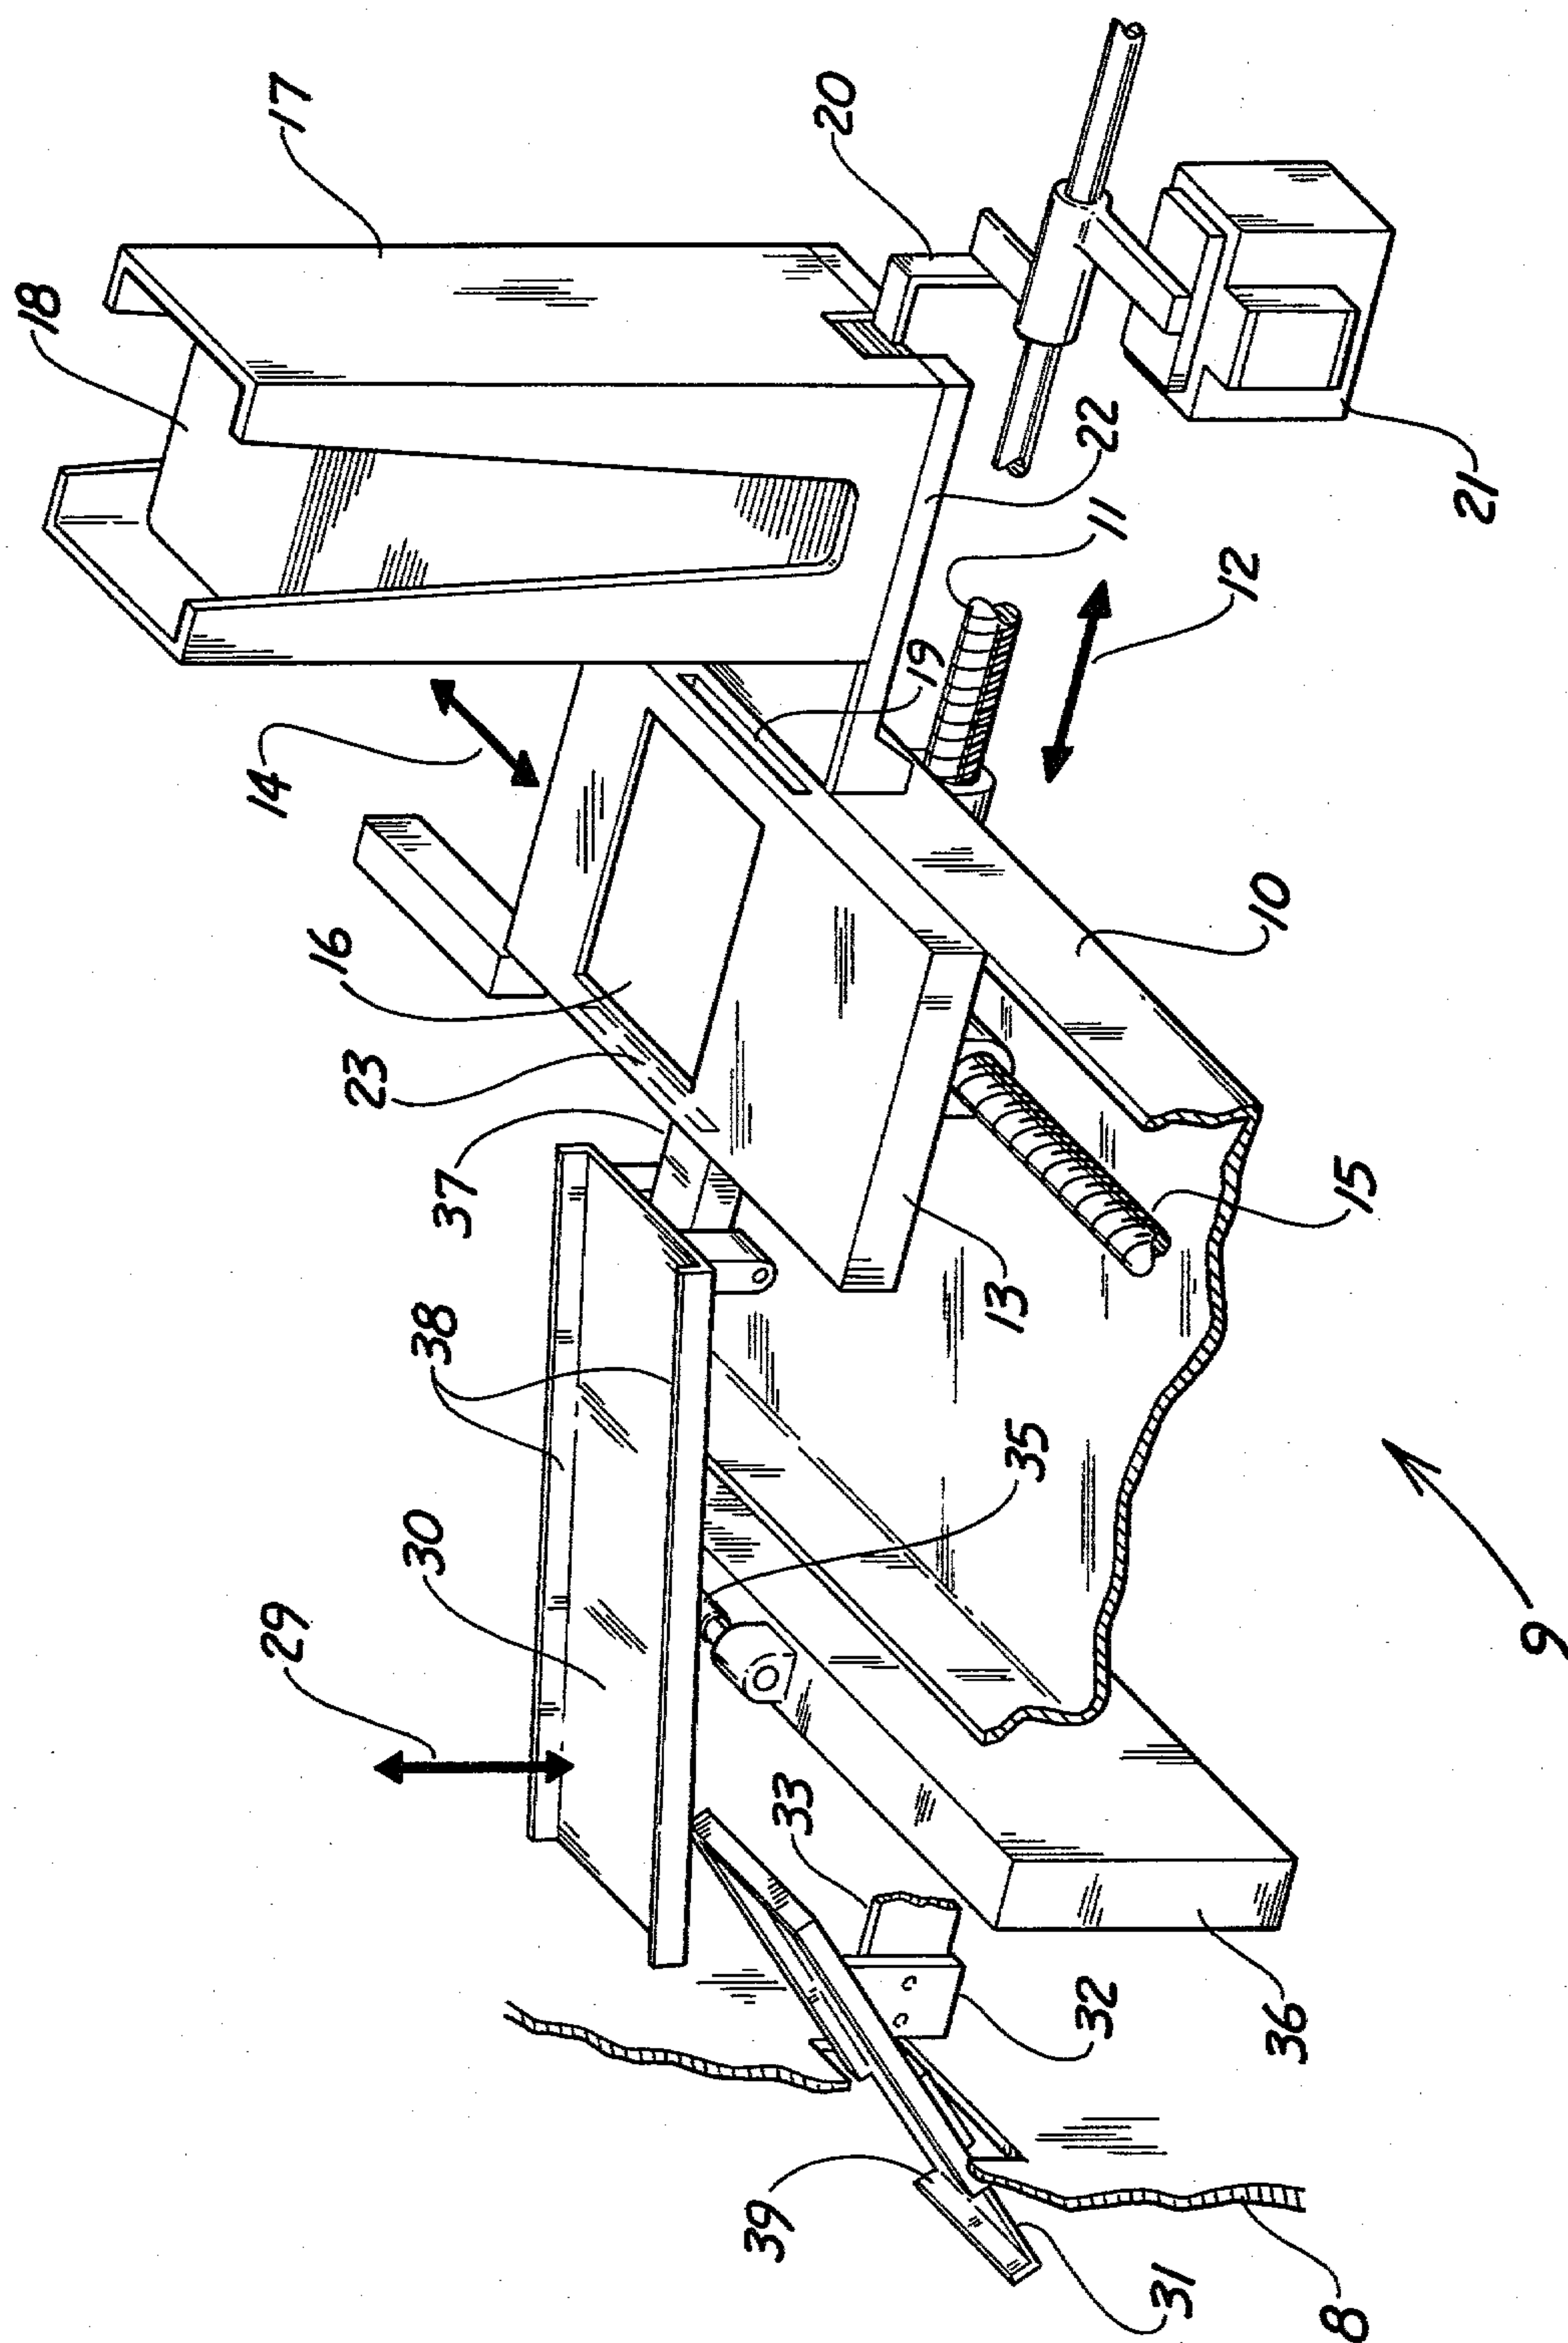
PLATE FEEDING DEVICE FOR EMBOSSING MACHINES
